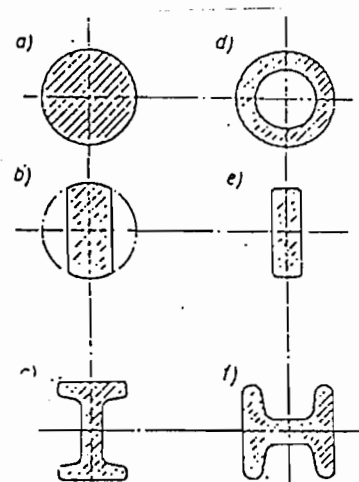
Cross-sections of connecting rod shanks: a) circular; b) sides machined from circular shape; c) I-shaped; d) circular, hollow; e) rectangular; f) H-shaped
